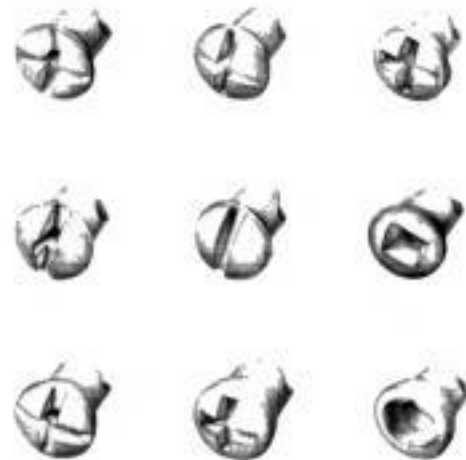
Screw heads with a variety of configurations from different systems and companies. Top, cruciate and Phillips screw heads. Center, slotted and center drive screw heads. Bottom, special screw heads with cruciate, Phillips, and hexagonal socket heads.
